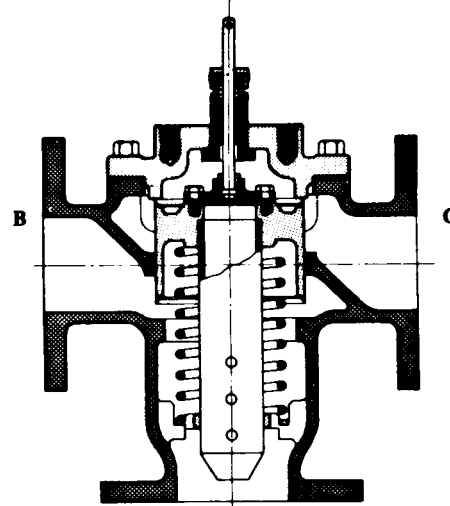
This drawing shows a method of controlling the cooling of engine lubricating oil.
